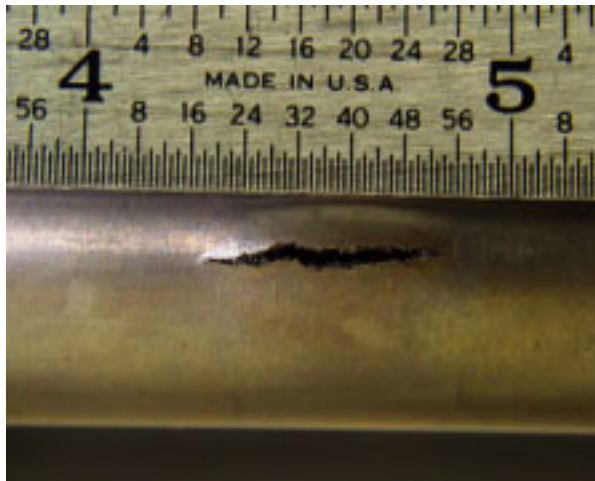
Post-test view of the OD surface of specimen SGL 480
